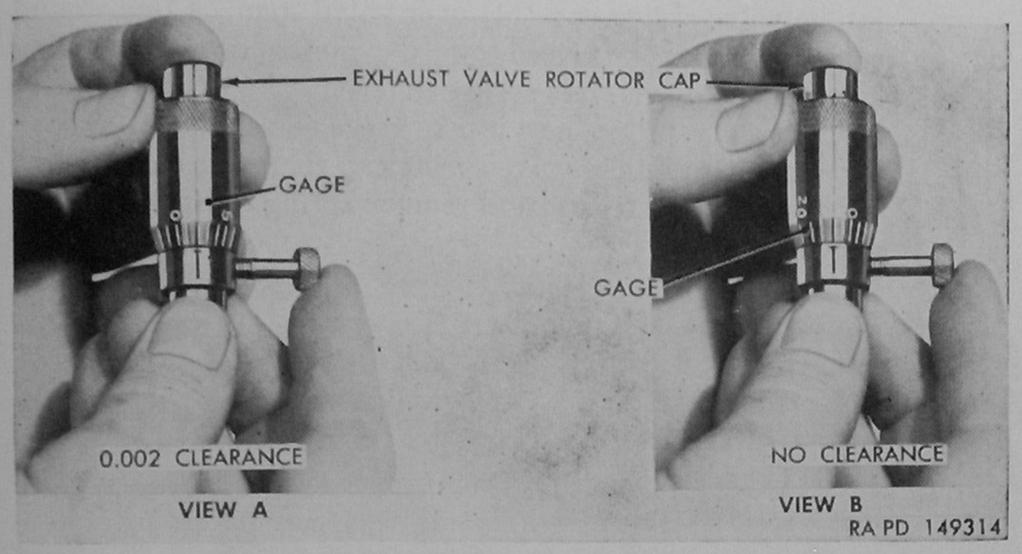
Using gage 7083104 to check valve rotator cap clearance.
